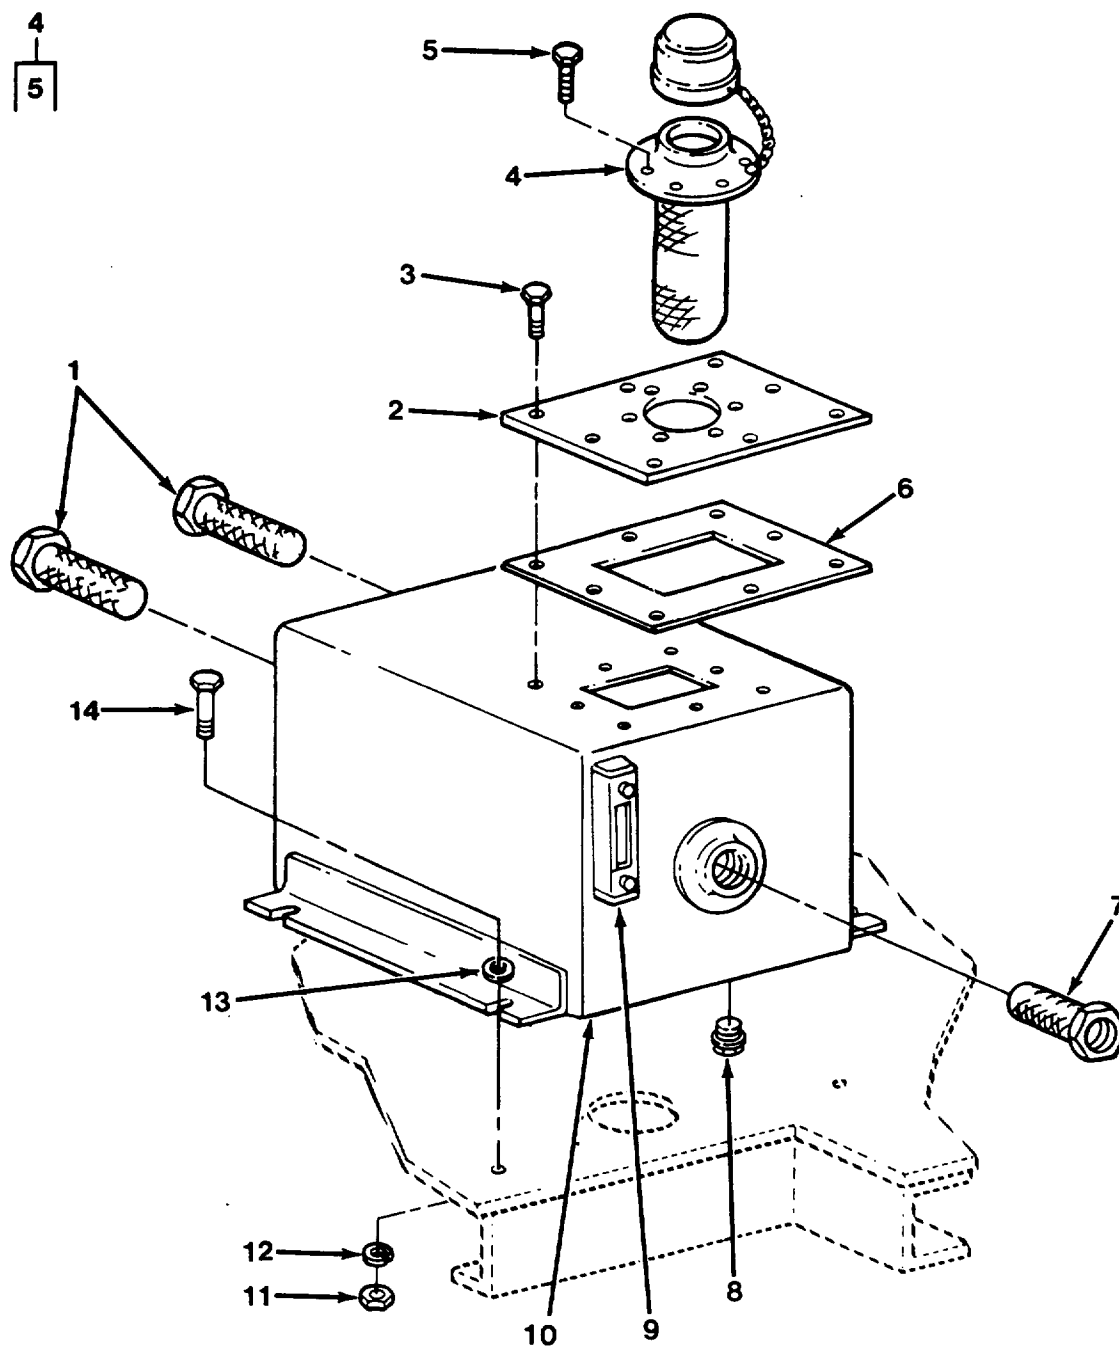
HYDRAULIC TANK VALVE ASSEMBLY
